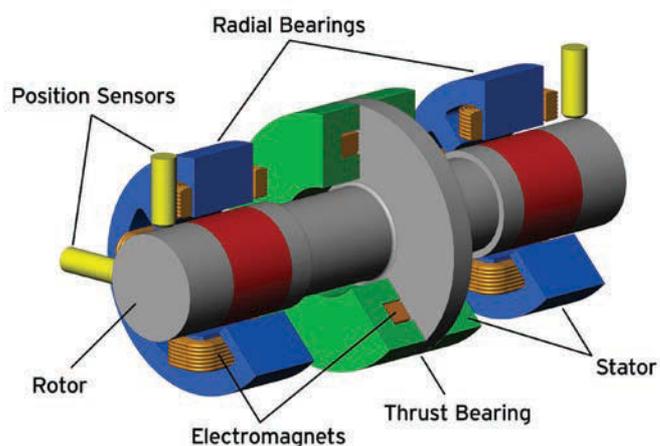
Cutaway of a shaft under 5-axis support showing AMB components
